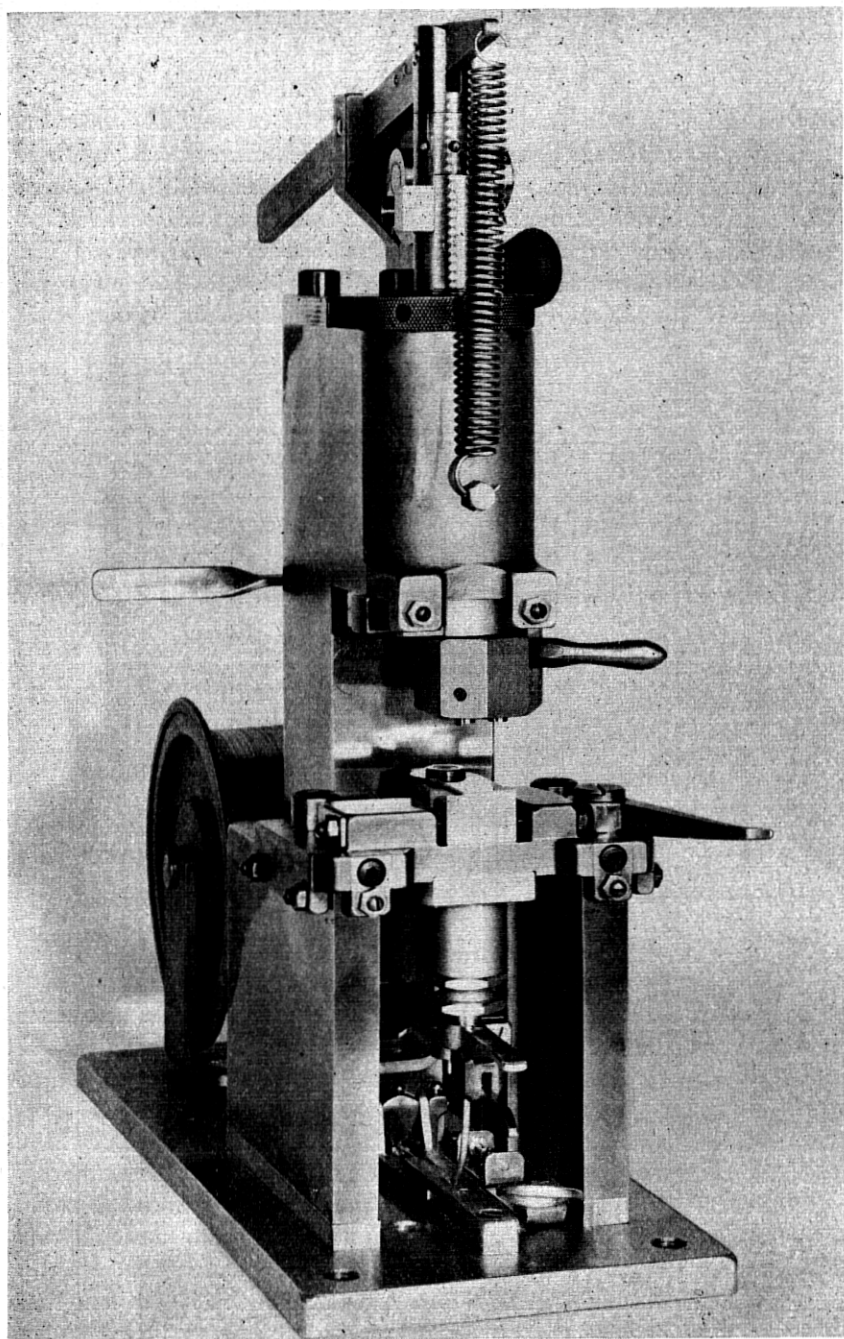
Tool for cold-heading phosphor-bronze wires.
